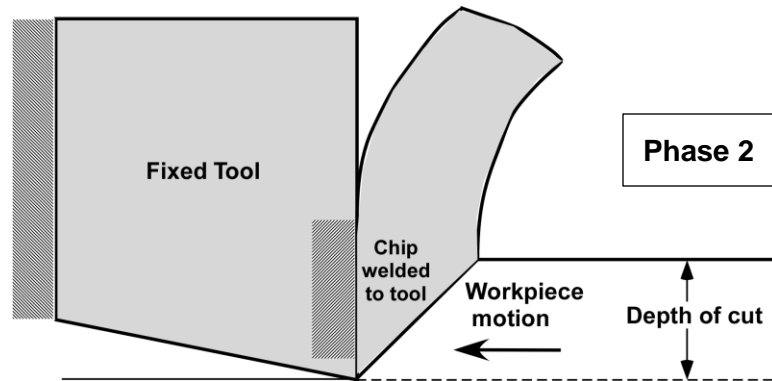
Due to Force/Temperature at the Chip/Tool Interface, the Chip Becomes Welded to the Tool. As a Result the Tool/Chip Becomes the “New” Tool and Forces/Part Roughness Will Increase.
